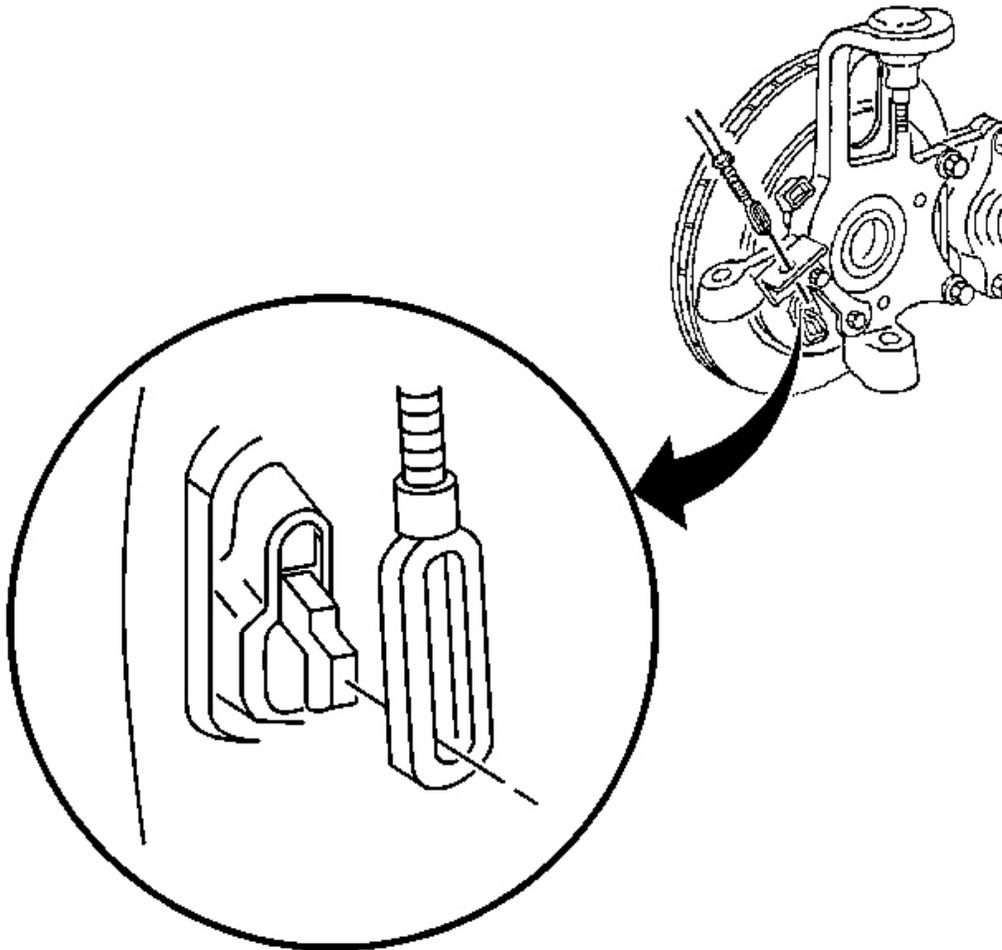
View Of Parking Brake Cable To Parking Brake Lever
